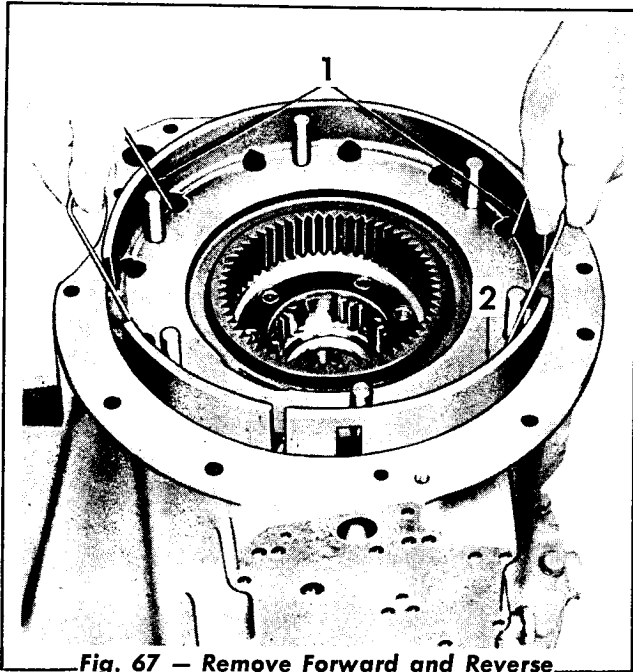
Remove Forward and Reverse Clutch Anchor
